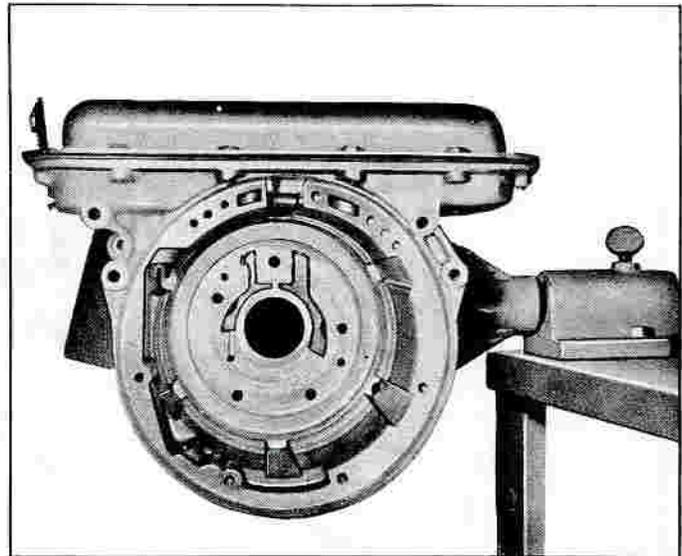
E-49—Transmission Case Installed in Holding Fixture J-7896
